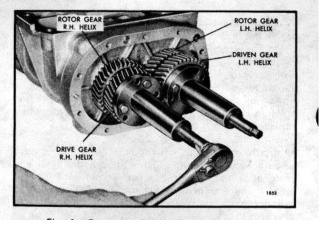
Removing Blower Rotor Gears from Blower Rotor Shafts with Tool Set J 6270-F
